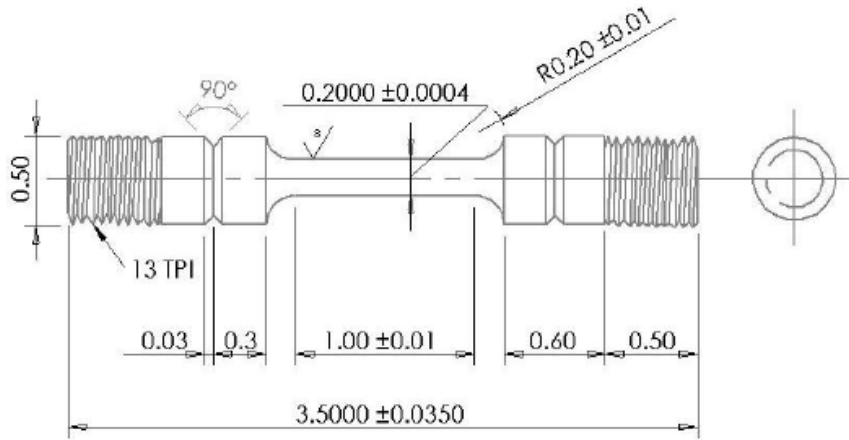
Specimen drawing used for the creep deformation and rupture testing of grade P91 steel (all dimensions in inches).
